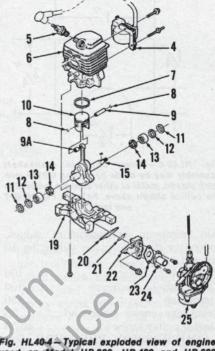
Typical exploded view of engine used on Model HB-280, HB-480 and HB-680 Blowers and Sprayers. Bearing (9A) is only used on later models HB-480 and HB-680.
